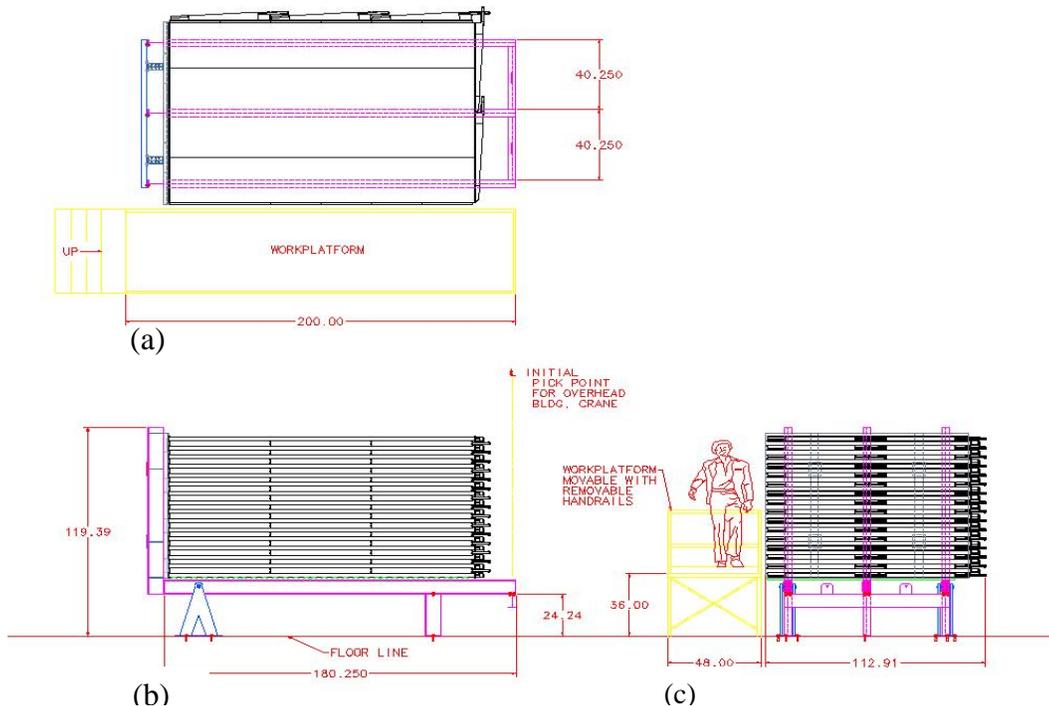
The Near Detector assembly table. Part (a) is a plan view of the table itself. Part (b) is an elevation view of the table holding a completed block. The hinge for rotating the block to upright is seen on the left. Part (c) is a transverse cut of the completed block on the table. The work platform height is adjustable so that the workers move higher as planes are added.
